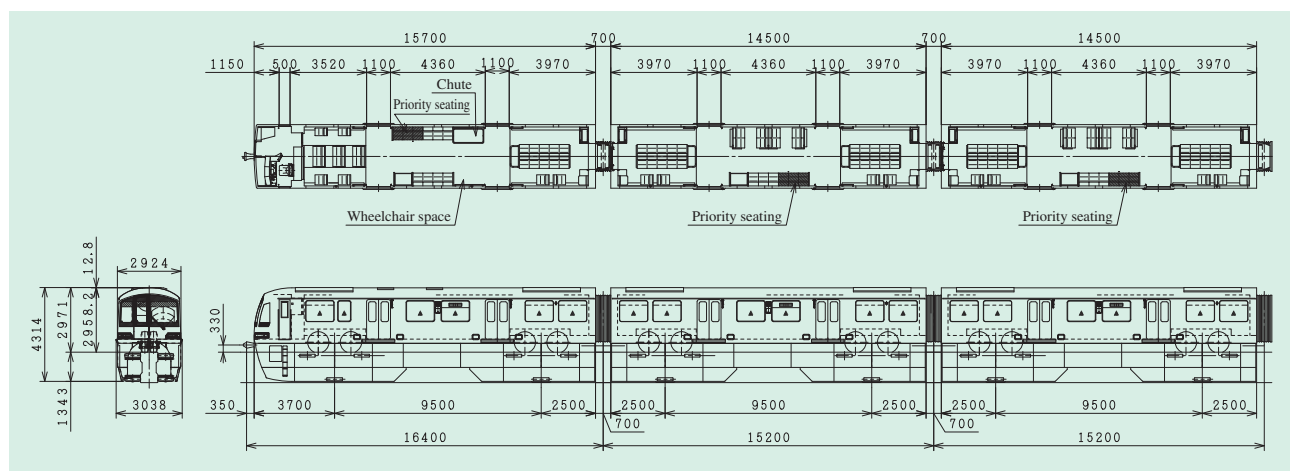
Rolling Stock Layout and Dimensions (mm).
